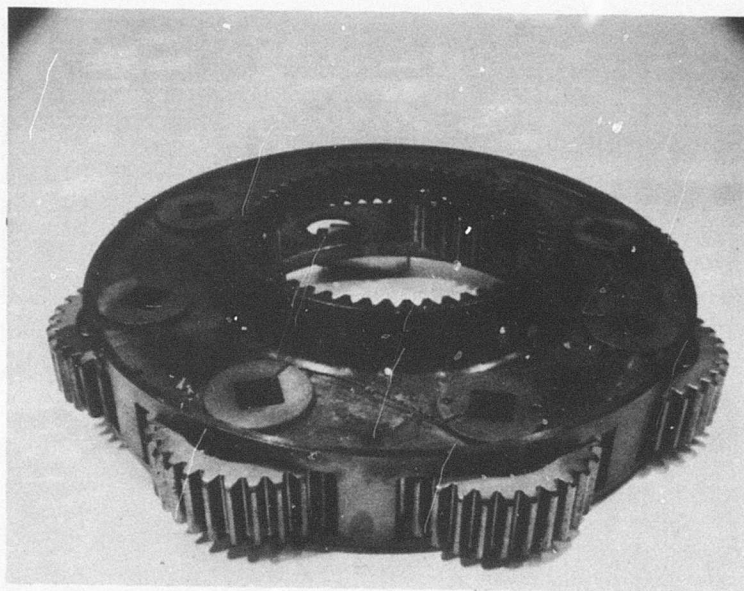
Upper planetary assembly following 4.0-hour emergency lubrication run.
